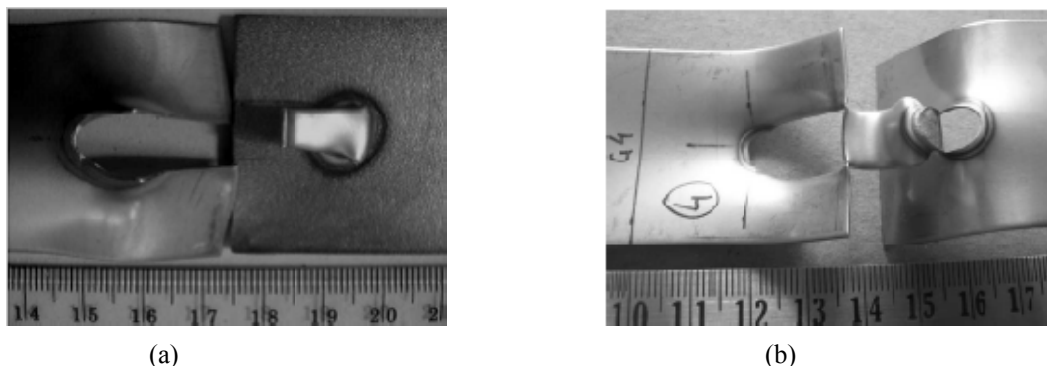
The fracture mode of tensile shear test samples: (a) 3.0-1.0 mm joint (b) 1.0-1.0 mm joint
